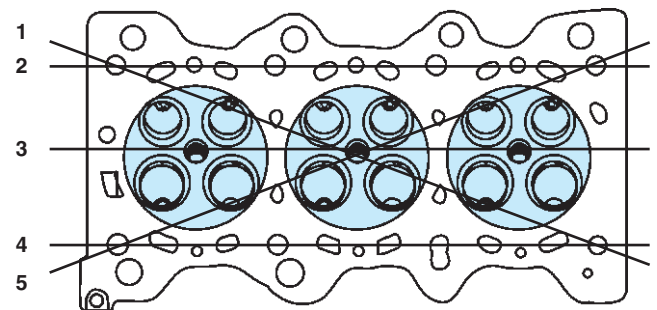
Cylinder heads should be checked in five planes for warpage, distortion, bend, or twist.
